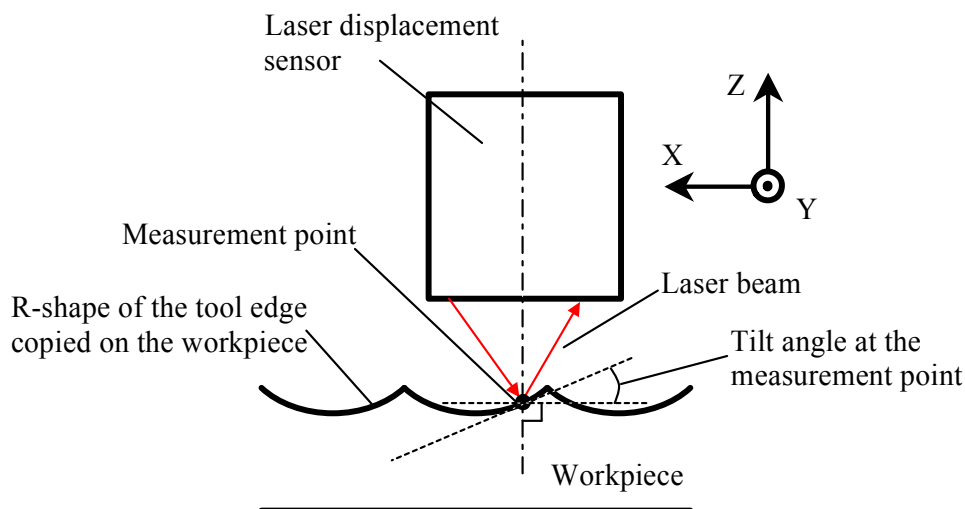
Schematic view of the measurement point in the on-machine measurement of the workpiece profile.
